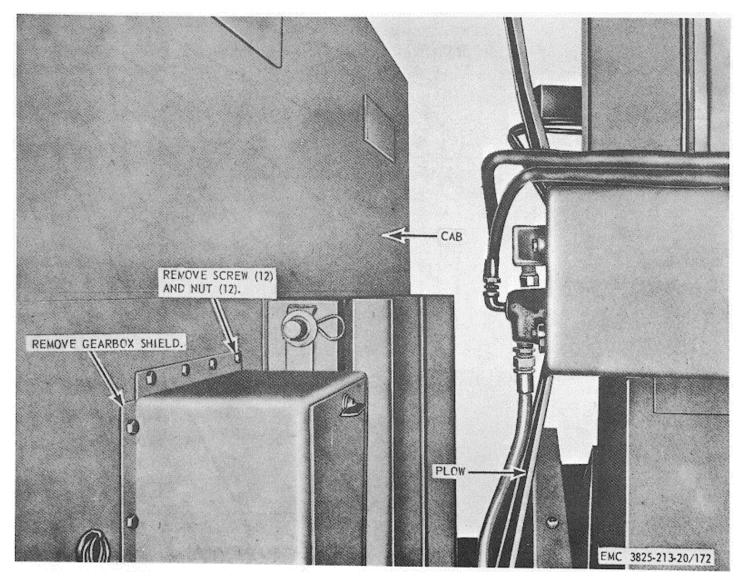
Carrier steering assembly gearbox shield, removal and installation.
